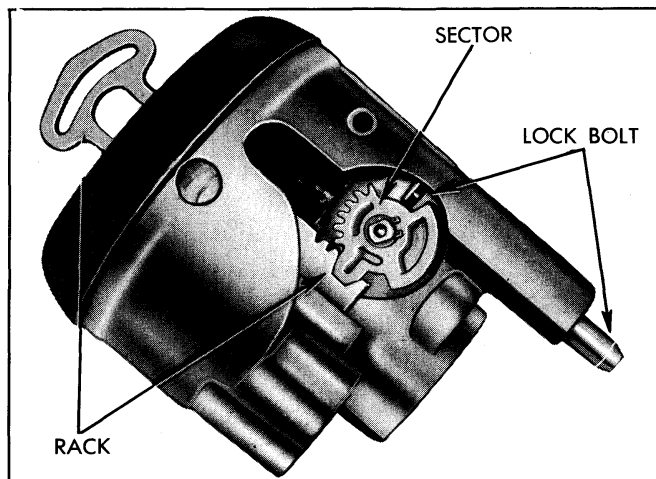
B-95--Installing Lock Bolt and Rack Assemblies
